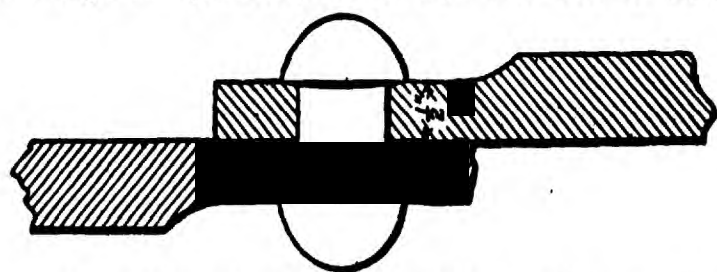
Circumferential Joint for Thick Plates of Horizontal Return Tubular Boilers.
